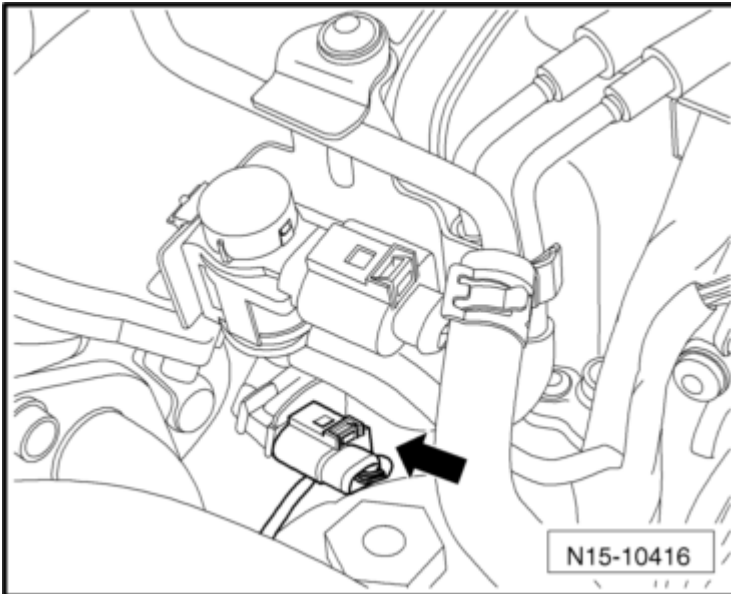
Identifying Camshaft Position Sensor -G40- Connector -Arrow-
